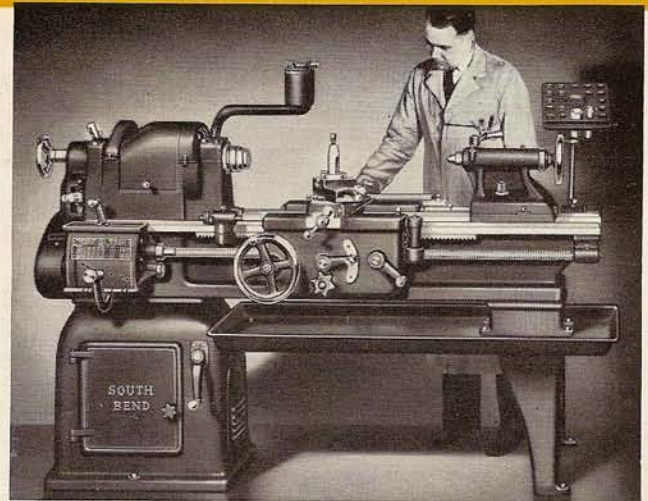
16" x 6' Underneath Belt Motor Driven Quick Change Gear Precision Lathe Equipped with Tool Room Attachments
